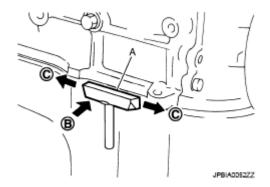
Sliding Seal Cutter Courtesy of NISSAN MOTOR CO., U.S.A.
